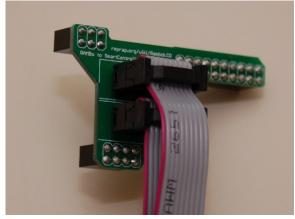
C: Red or Blue Display PCB cabling.
